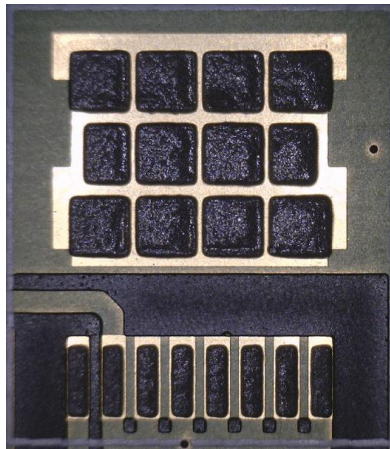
Sample Solder Paste Test Print on an SMD Land Pads
